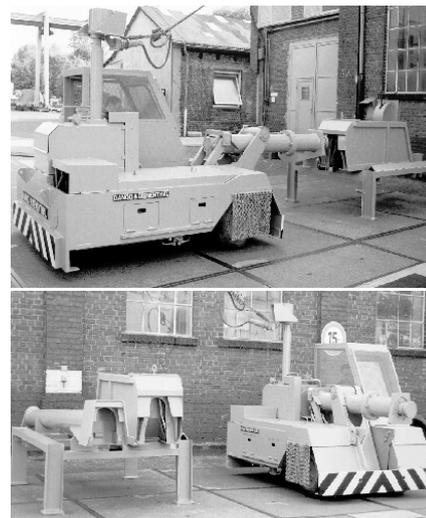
Automated mobile and operator driven charging and stoking machine type MAS II
